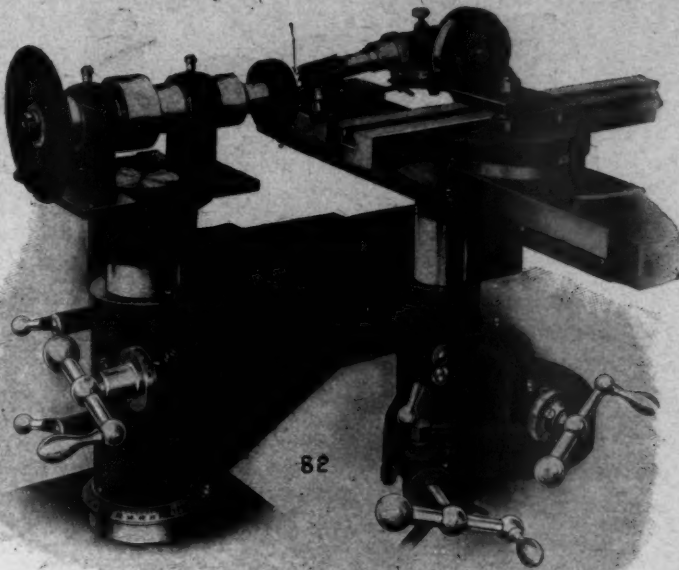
SHARPENING END TEETH OF AN END MILLING CUTTER.
